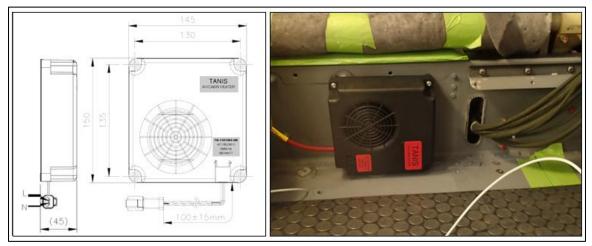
Example of optional AV/Cabin Heater THP3094- located behind crew seat on aft side of bulkhead secured using 4-each Stud Mount Kits p/n: TU03262. Heater is available in kit that includes cabling and adjustable thermostat, AV/Cabin Heat Kit p/n: TU03323. Refer to Cable Kit wire diagram drawing 02861 and Heater Instruction TN03323 and/or TN03094.
